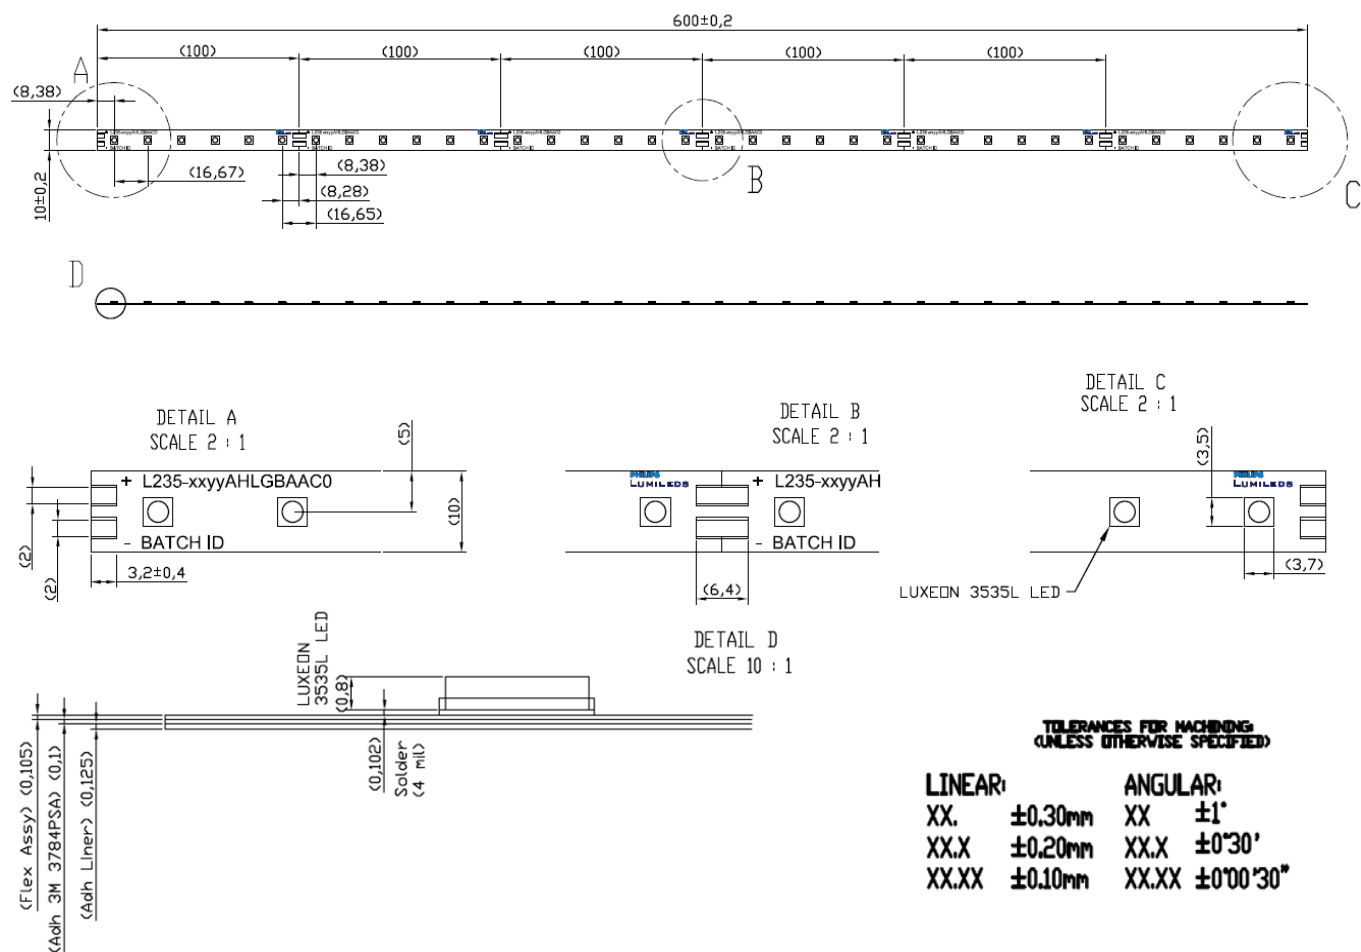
Mechanical drawing for L235-xyyyAHLGBAAC0.
